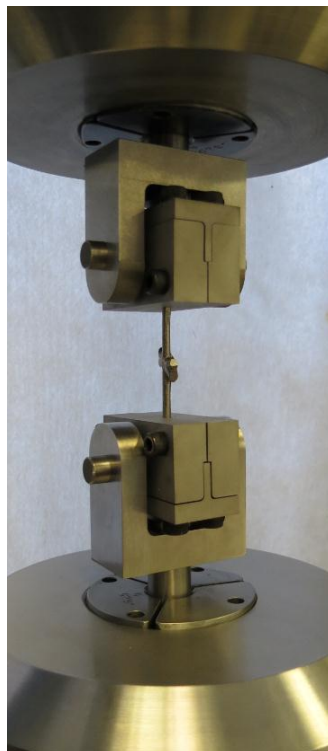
Assembled Fixture with Specimen Mounted in Test Frame
